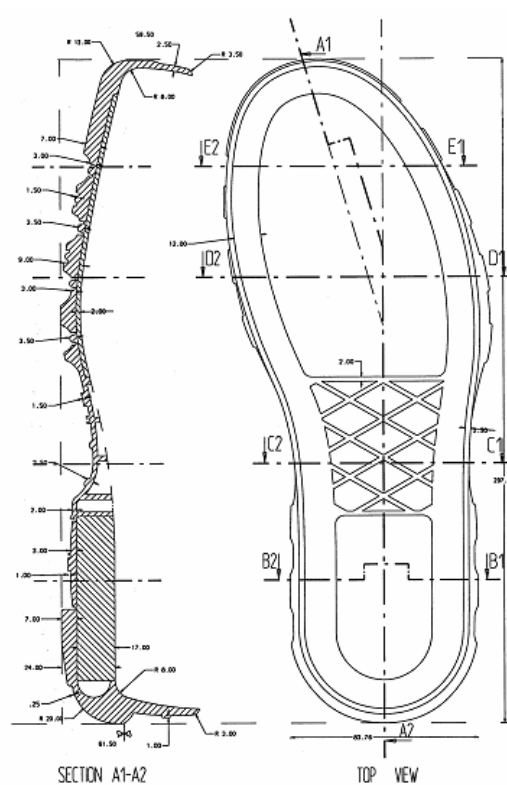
Technical drawing of the boot supplied by Diadora.
